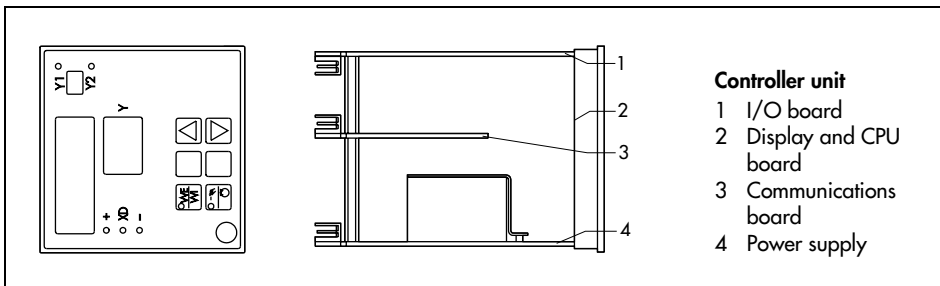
· Arrangement of microprocessor boards in the controller unit
